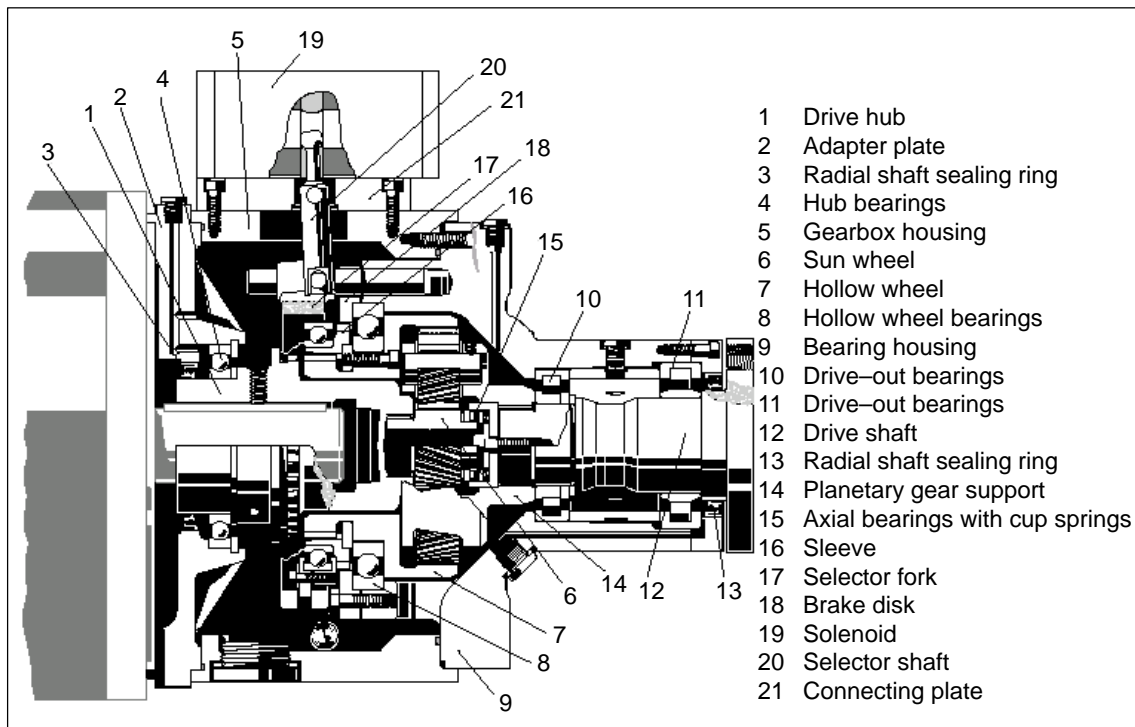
Gearbox design for 1PH7, SH 100 to 160
